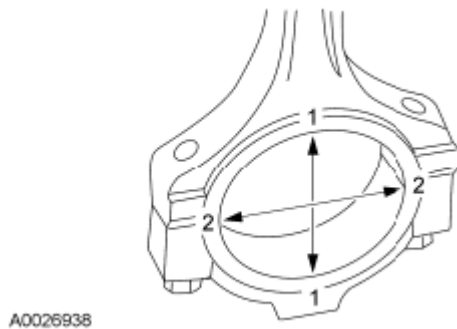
Identifying Connecting Rod Large End Bore Measuring Directions
